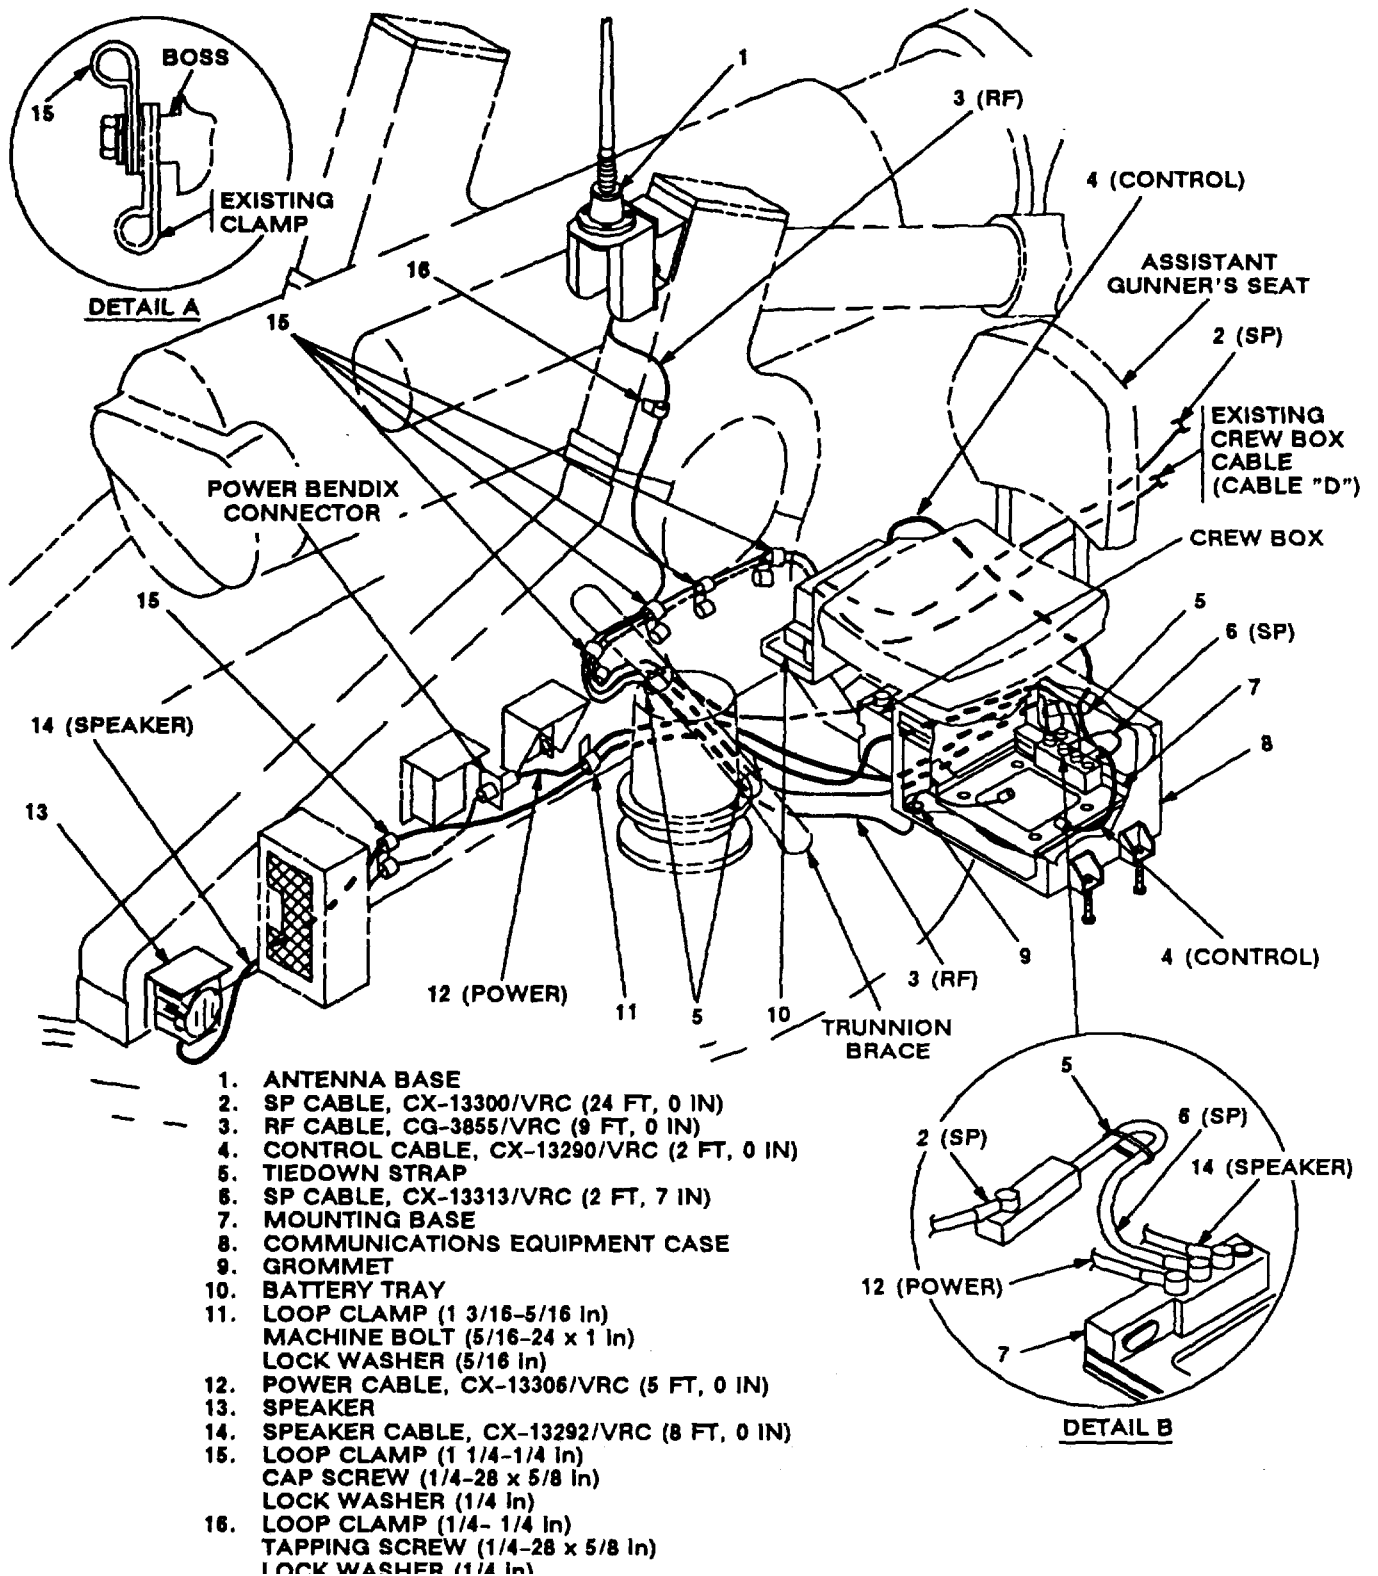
(2). Cable Installation: Assistant Gunner's Station
